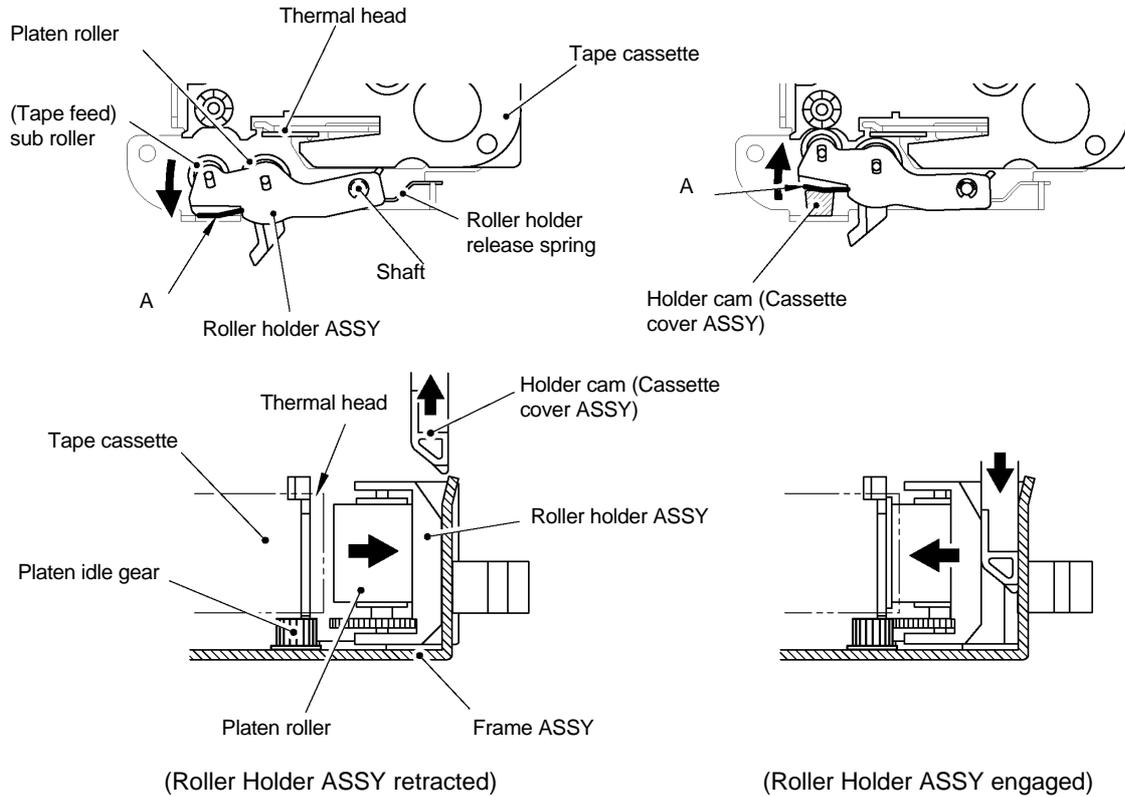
Holder Cam (Cassette Cover ASSY) and Roller Holder ASSY
